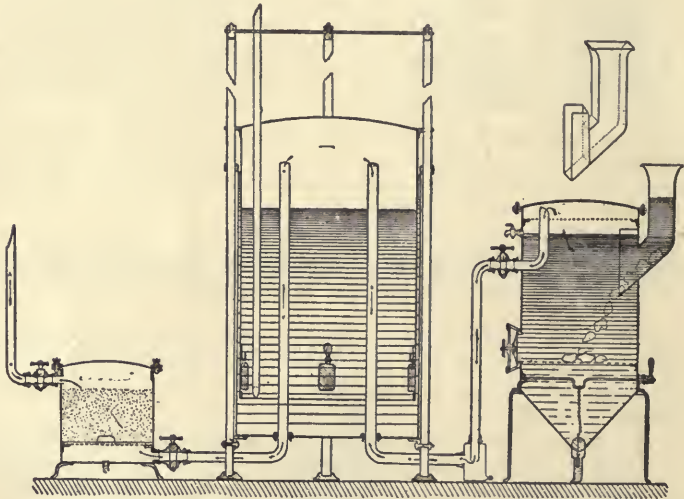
Non-automatic generator, type “Autogenous Welding.”
